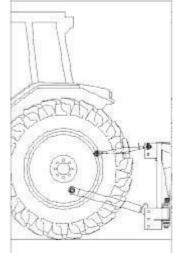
The top link must be higher on the machine side than on the tractor side!
